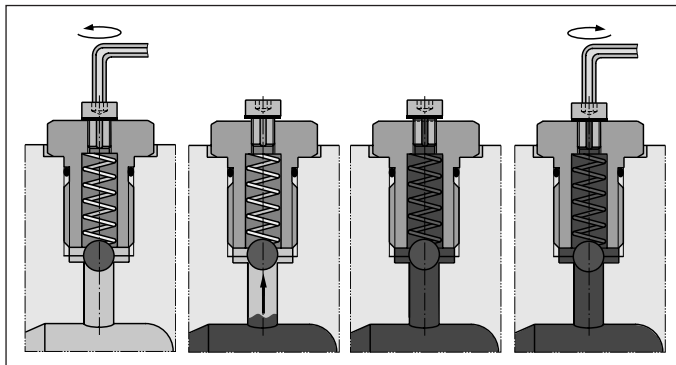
Filling and bleeding hydraulic cylinders with check valve
